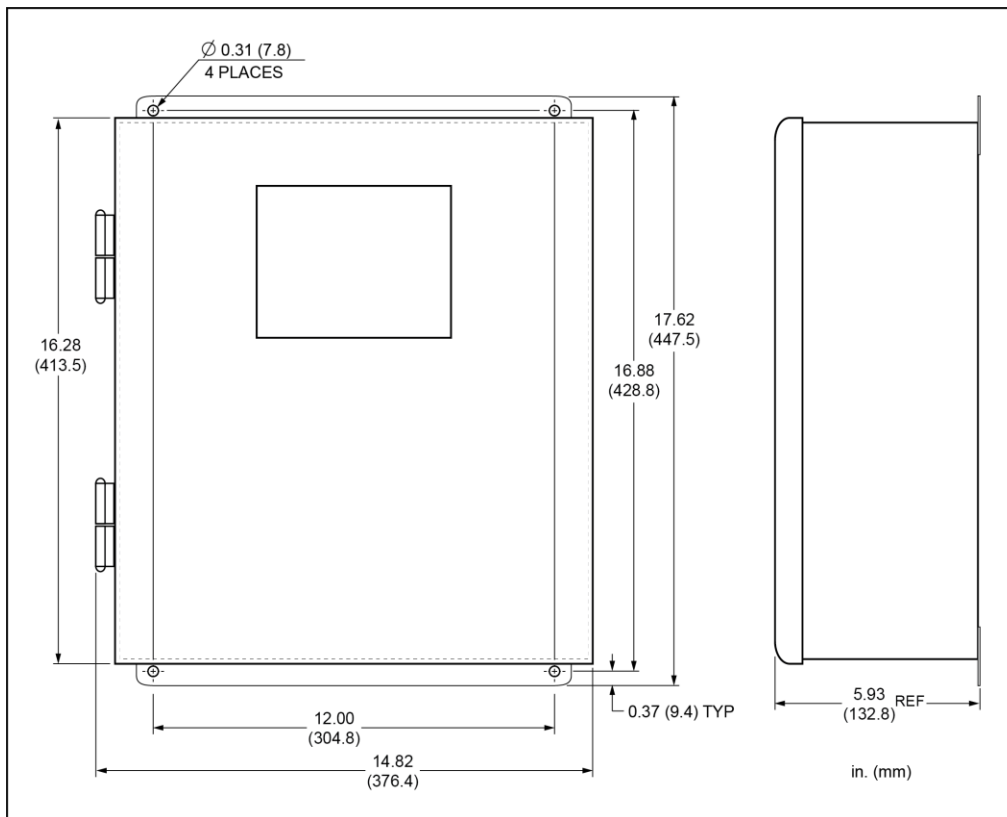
WPC APEX Control Enclosure Mounting Dimensions
